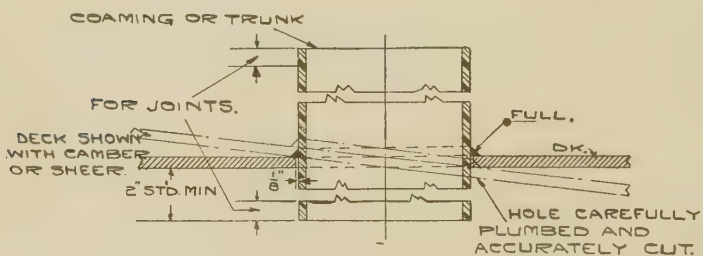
Details of joints for welded vent ducts and trunks.
